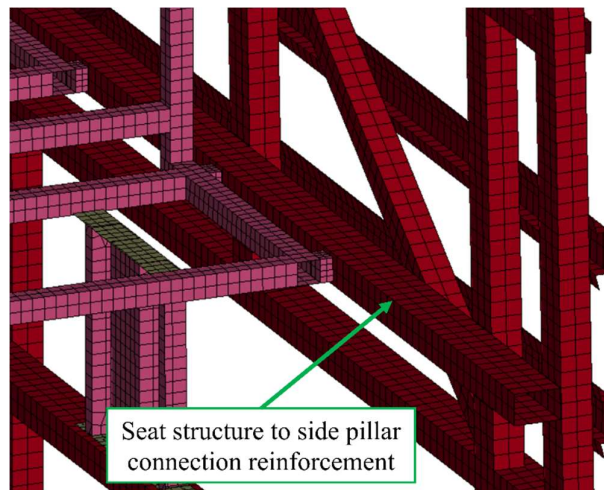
Isometric view of the seat structure to side pillar connection reinforcement.
